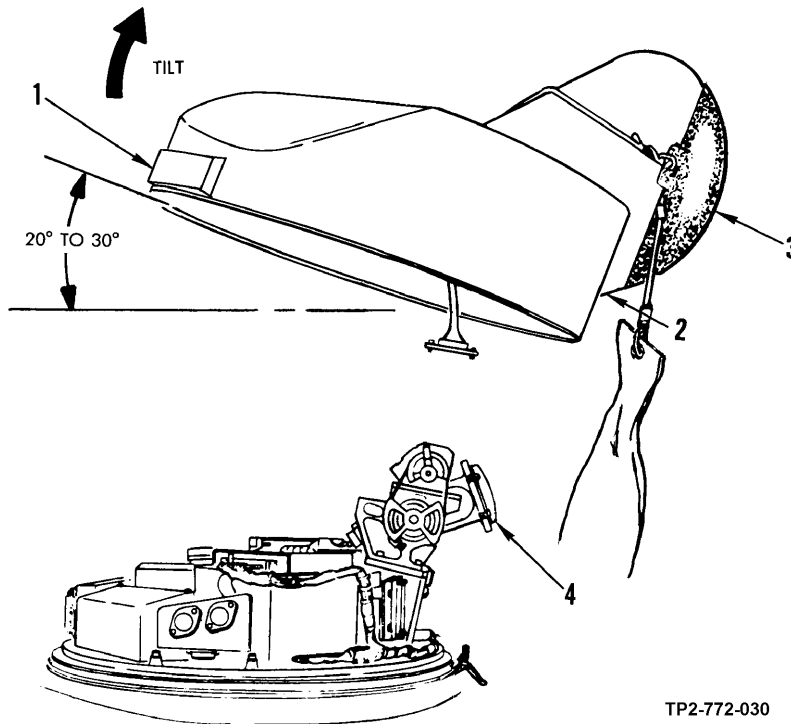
Shroud Tilting Prior to Installation on PNVS NSA
